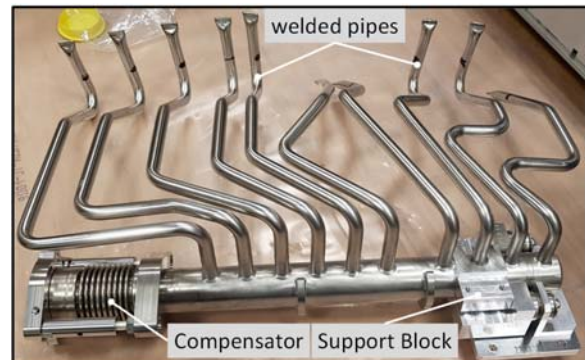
Compensator welded to the manifold of TM1V. The pipes are already welded to the branches of the manifold before welding to the water connectors of the TEs.
